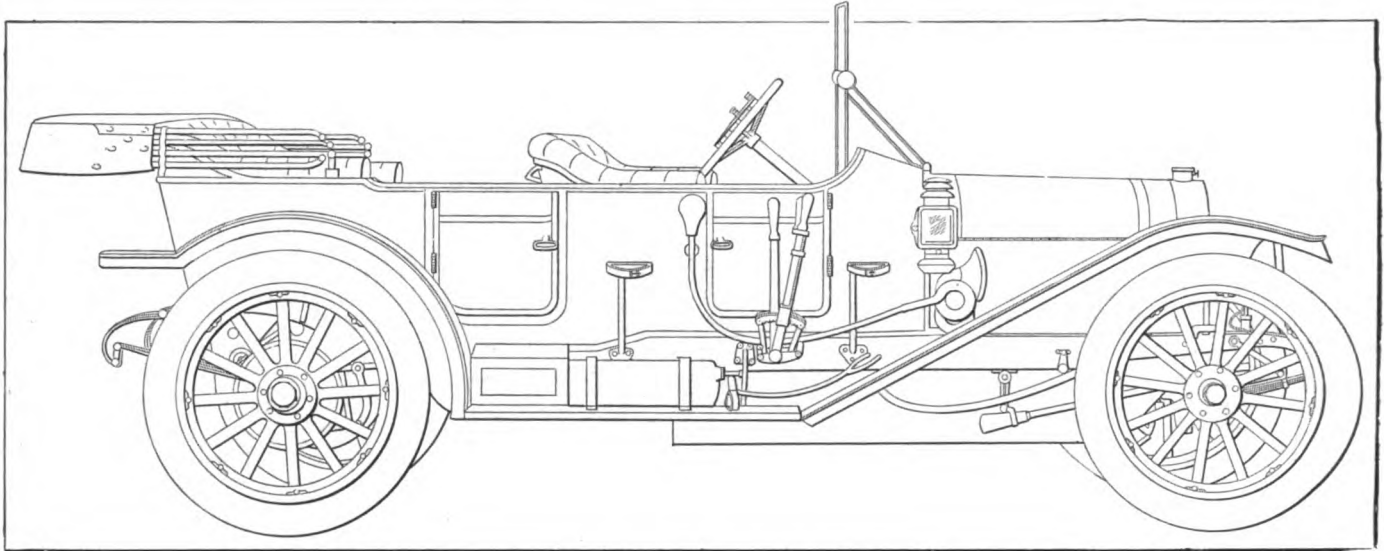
Right-hand side view of the 50-horsepower Kissel Kar Semi-Touring car showing the general equipment and the disposition of the side levers
